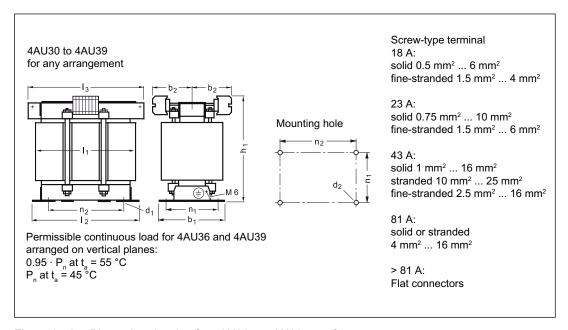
Dimension drawing for 4AU30 to 4AU39 transformers
